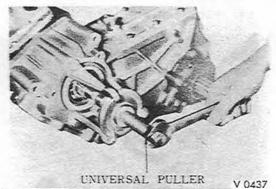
Removing the transfer case from the transmission case with universal puller.
